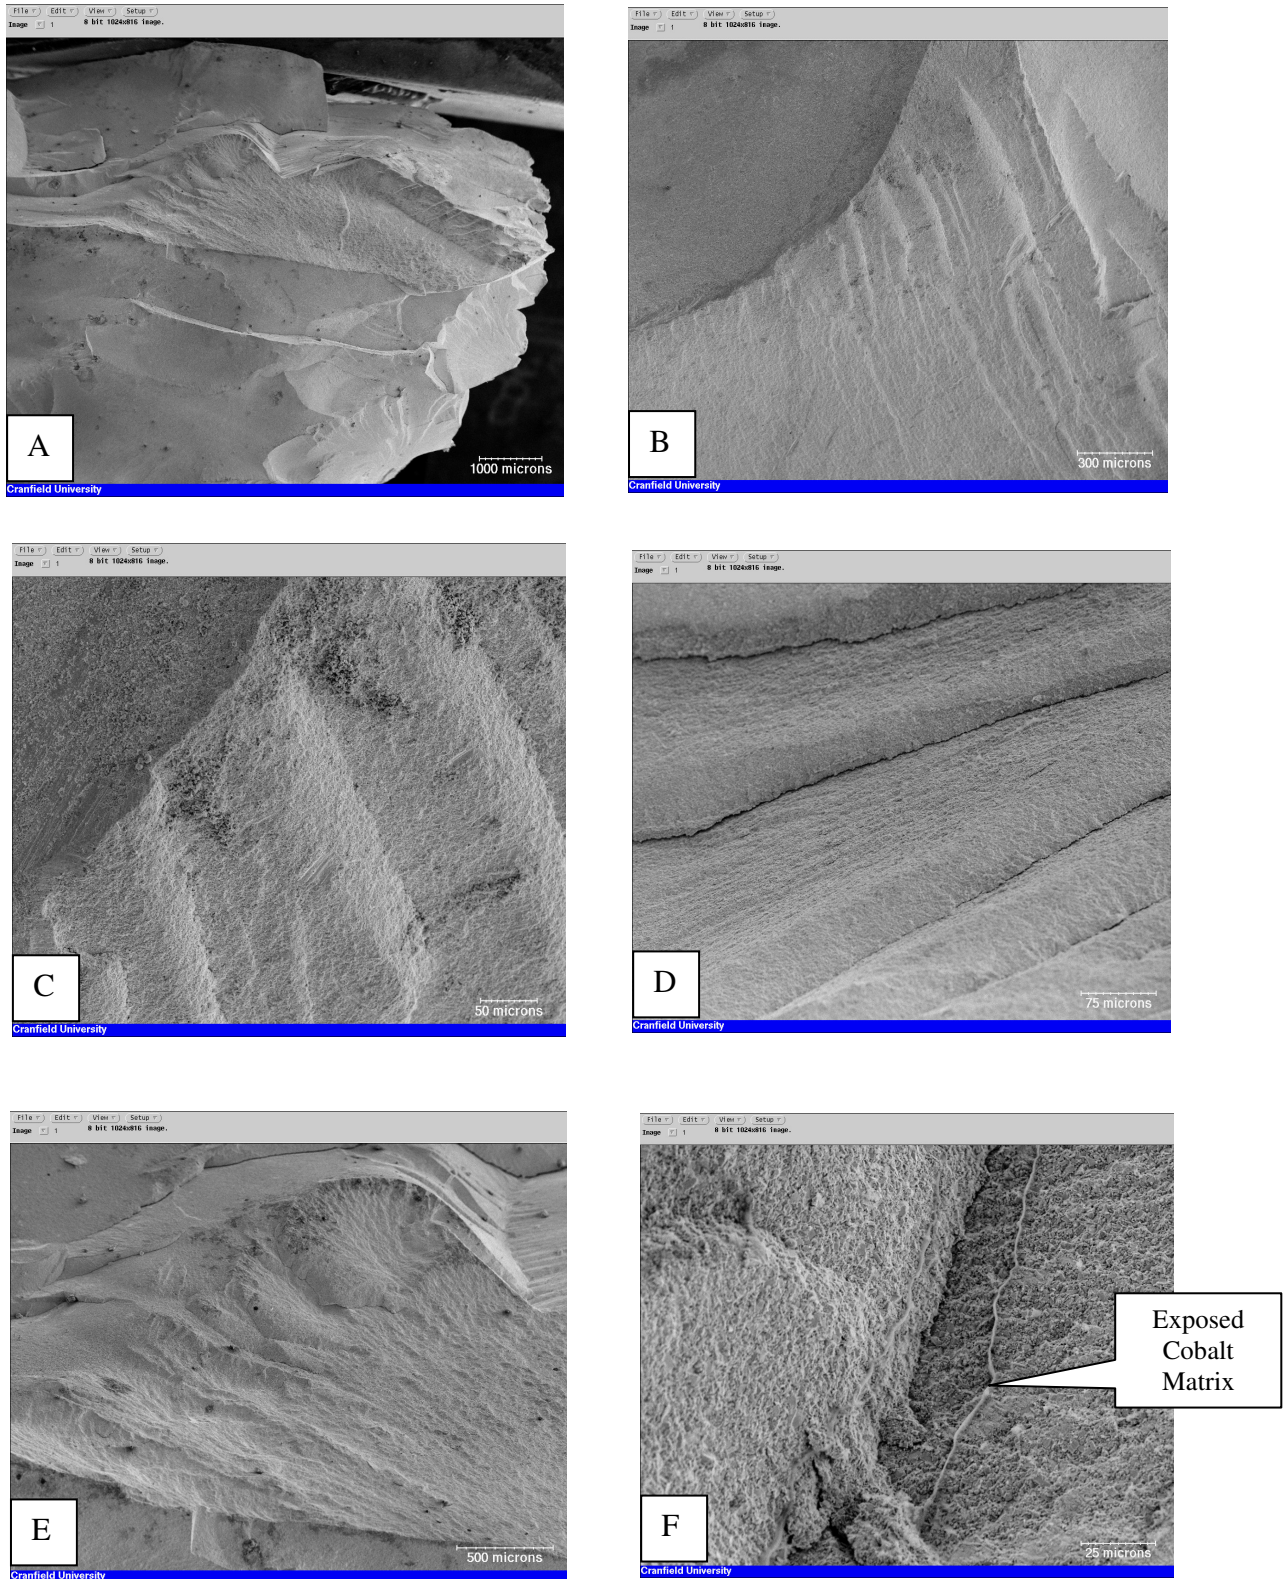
Six fracture surfaces removed from different residual penetrators after penetrating SiC B. (A) WC-Co spall section (B – E) Different regions from spall section A - Typically a “River” cleavage failure pattern formed during prominent regions of transgranular cleavage and (F) Exposed Co matrix prominent down a primary crack.
